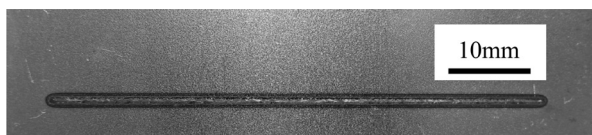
A bead on a plate fabricated by a 300-W laser diode
